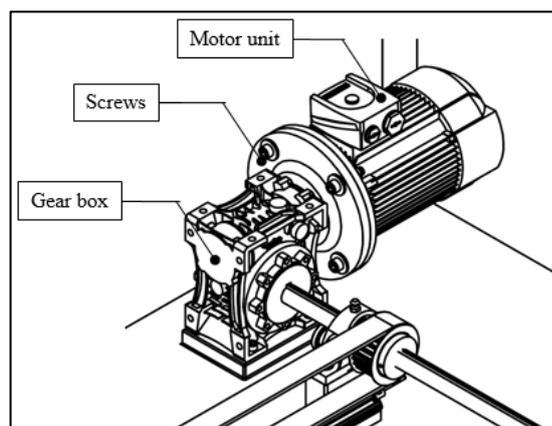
Motor and gear box unit assembled (VEM Motors Finland 2012, p. 5).
